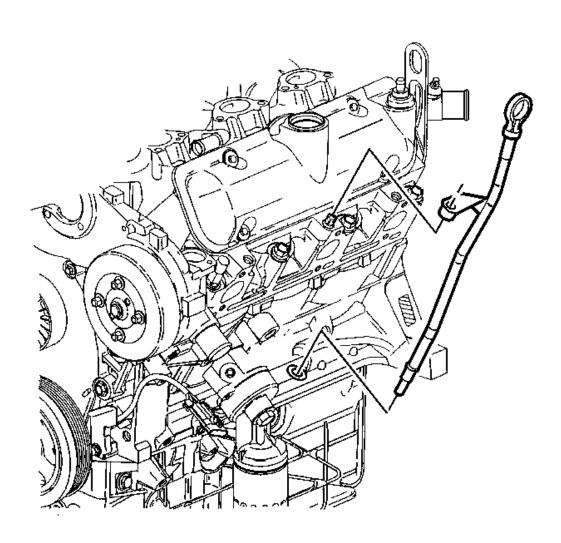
Removing/Installing Oil Level Indicator & Oil Level Indicator Tube Courtesy of GENERAL MOTORS CORP.
